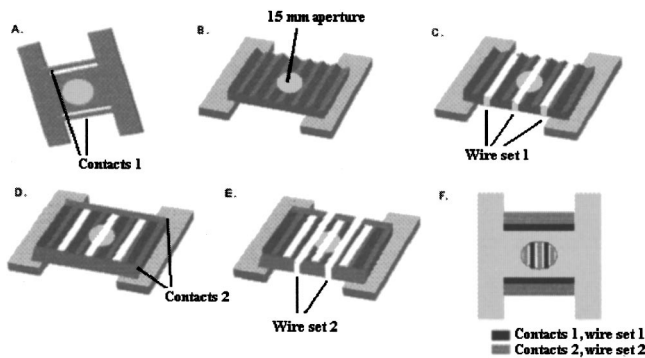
Assembly of the Bradbury–Nielson ion gates. (A) H-shaped portion of single-sided copper clad with center through hole and two isolated copper contacts. (B) Machined polymer fixed on insulated face of circuit board frame. (C) Wire set 1 wound through alternating grooves. (D) Contacts 2 fixed on ends of polymer portion, copper side facing out. (E) Wire set 2 wound between wires of set 1. (F) View of gate from copper face of circuit board frame. Both wire sets have been cut on this side of frame.
